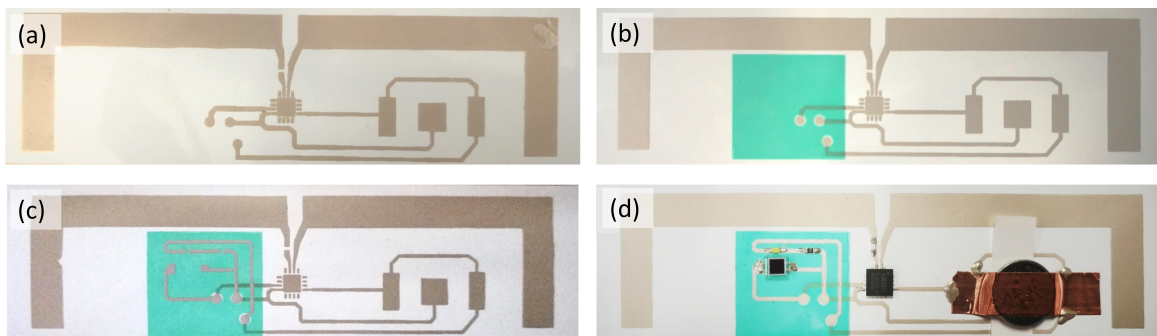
Printed wireless colour detector tag design, showing a) first printed layer, b) second printed layer (green dielectric), and c) third printed layer. d) Assembled printed tag with all components mounted. Tag dimensions = 110 mm \times 30 mm.
